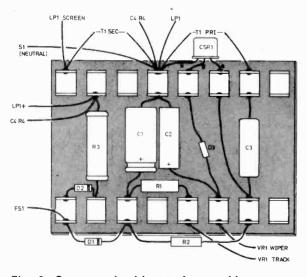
Component wiring and assembly on group board. Stand-off spacers should be used when connecting to case
